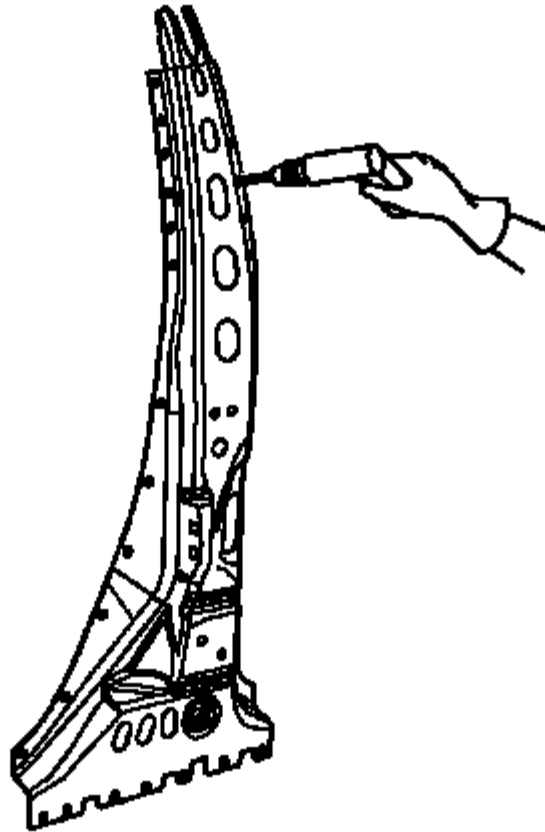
View Of Drilling Plug Weld Holes In B-Pillar Reinforcement
